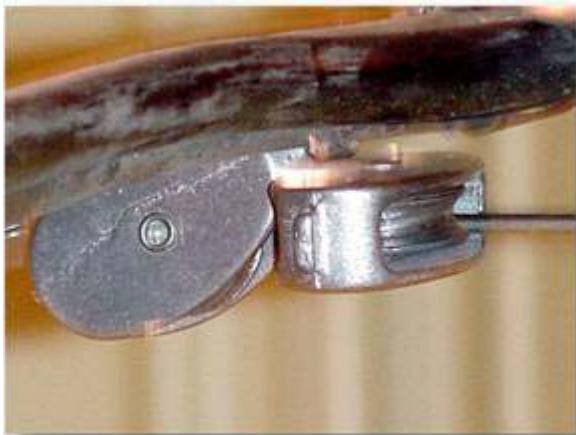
Support cable wedged between the roller and housing of the pulley
